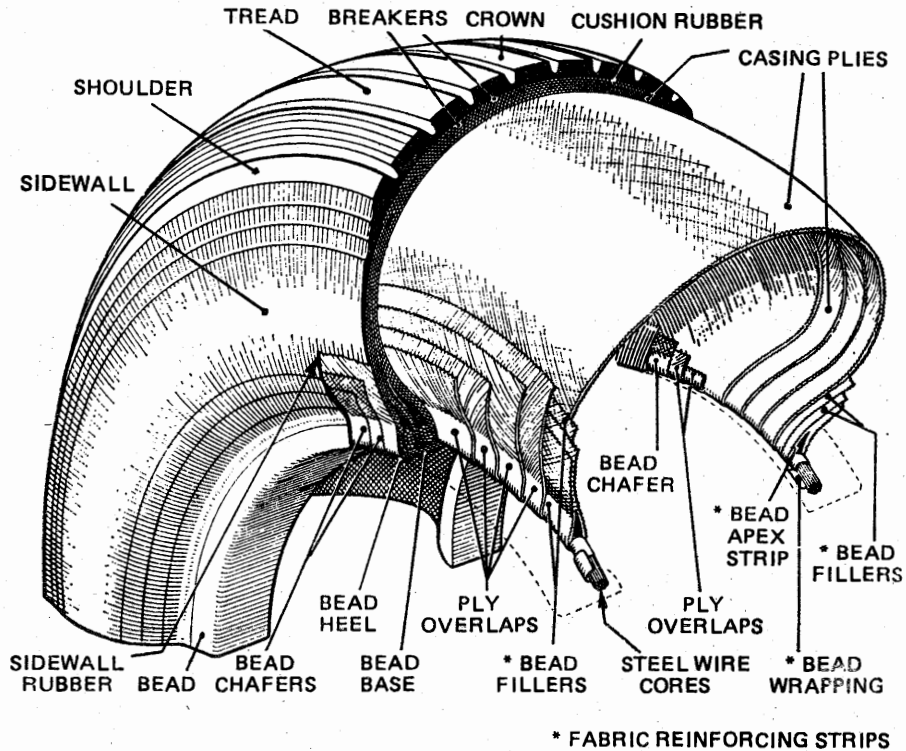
CONSTRUCTION OF TYPICAL TUBED TYRE
